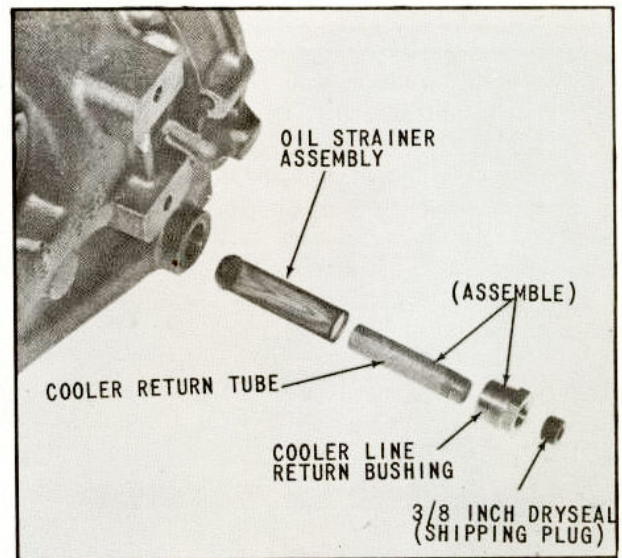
Installing Oil Strainer & Cooler Return Tube & Bushing Assembly
